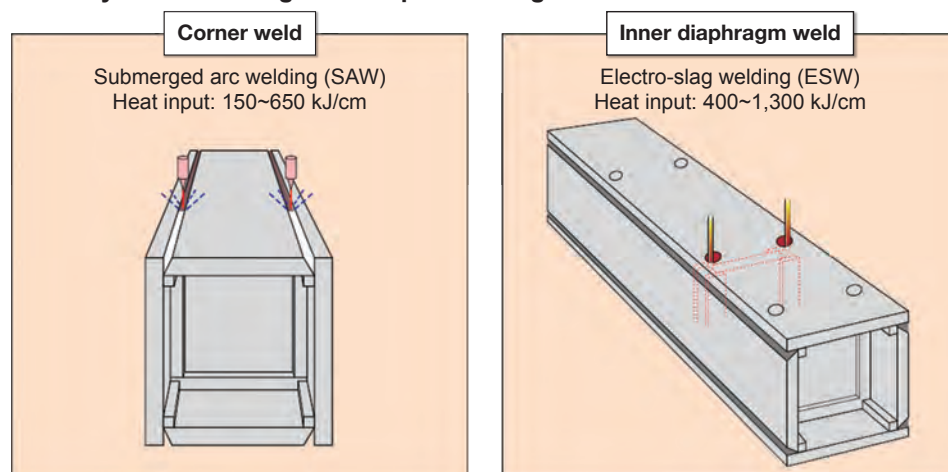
Outline of Column-Beam Connection of Box Column and Anxiety over Brittle Fracture Occurrence
